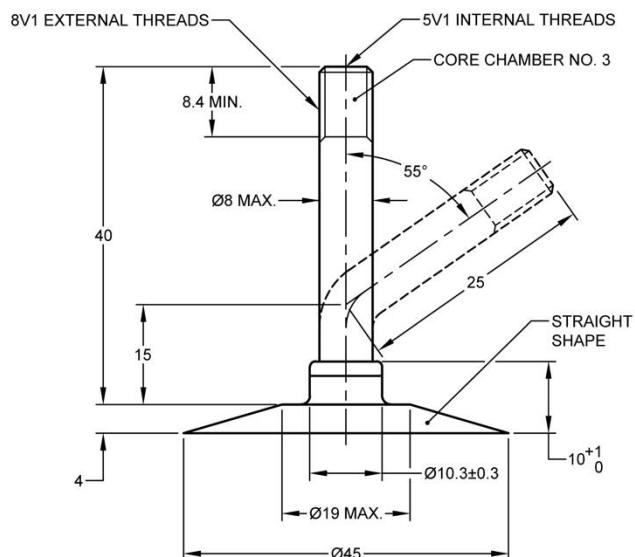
TUBELESS CLAMP-IN PASSENGER CAR VALVES
